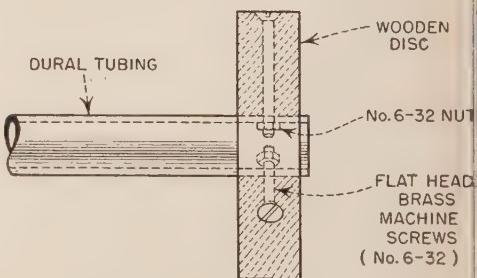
The wood plugs at either end of the coil form are drilled out to permit attaching them to the dural tubing. The text surrounding this drawing gives additional details.
